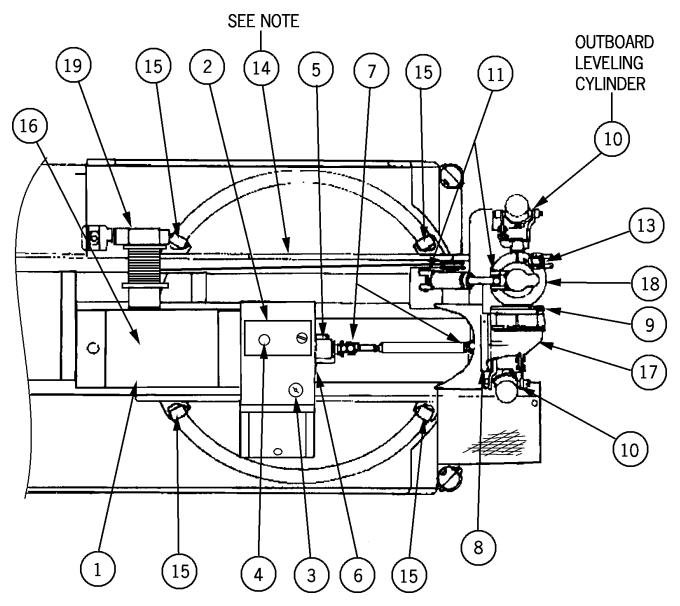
Typical Machine Layout - Specific machines may vary slightly. Outboard leveling cylinder is standard on Model 600, optional on all others.
